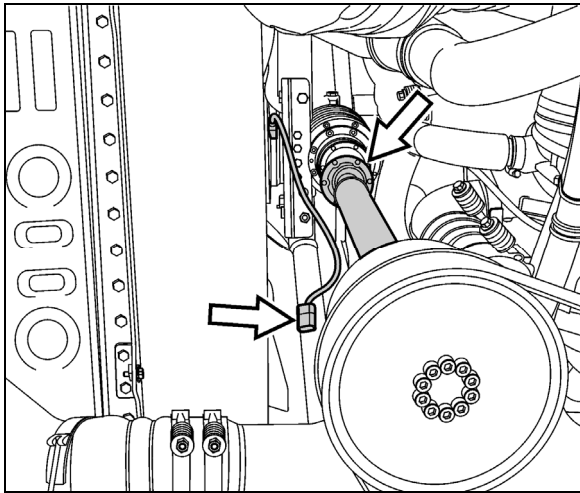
DISCONNECTING FAN DRIVE SHAFT
